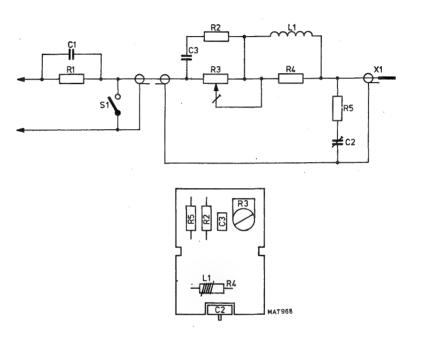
Electrical parts and p.c.b. lay-out of the probe
